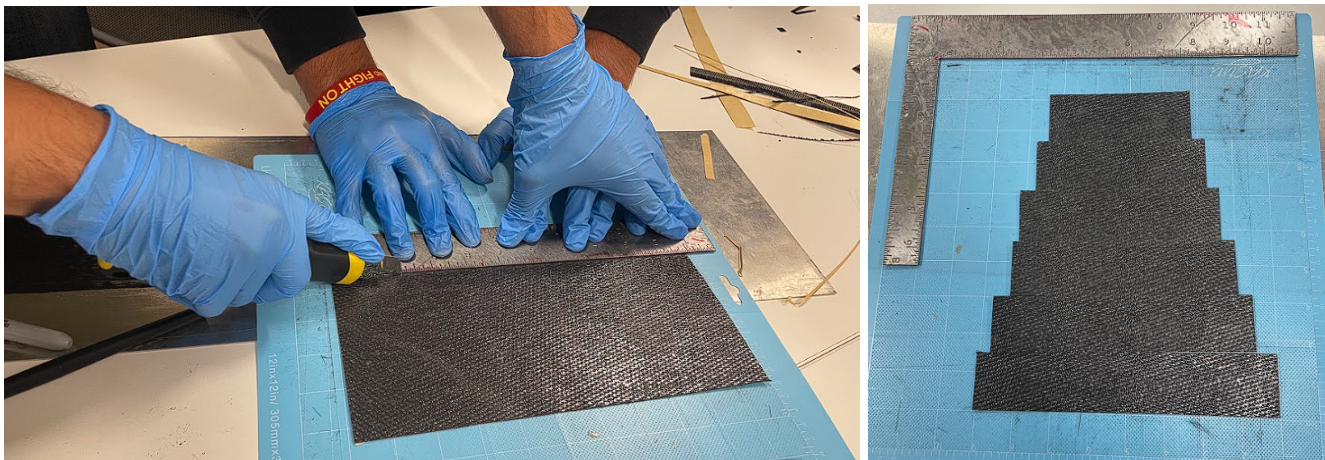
(A): Carbon fiber textile being cut to required dimensions. (B): Coupons laid out neatly on mold
